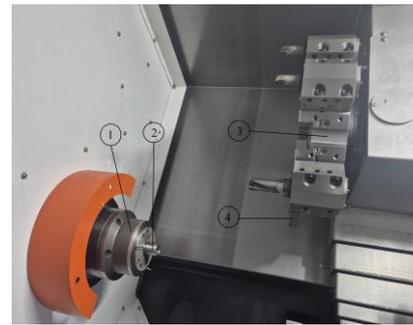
Workspace of a HARRIS C400 CNC lathe with robotic power supply (1 – chuck; 2 – workpiece; 3 – turret head; 4 – cutting tool)
